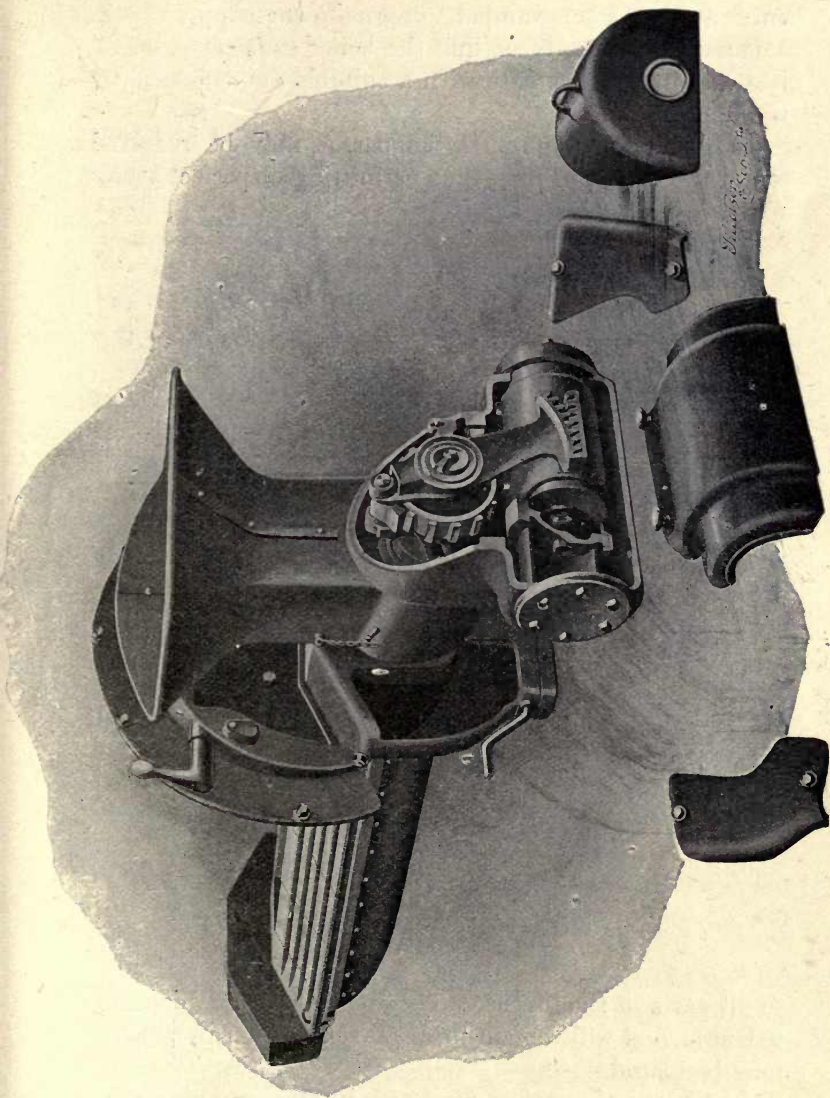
Protecting Shields of the Stoker removed to show the details of the Driving Mechanism.
